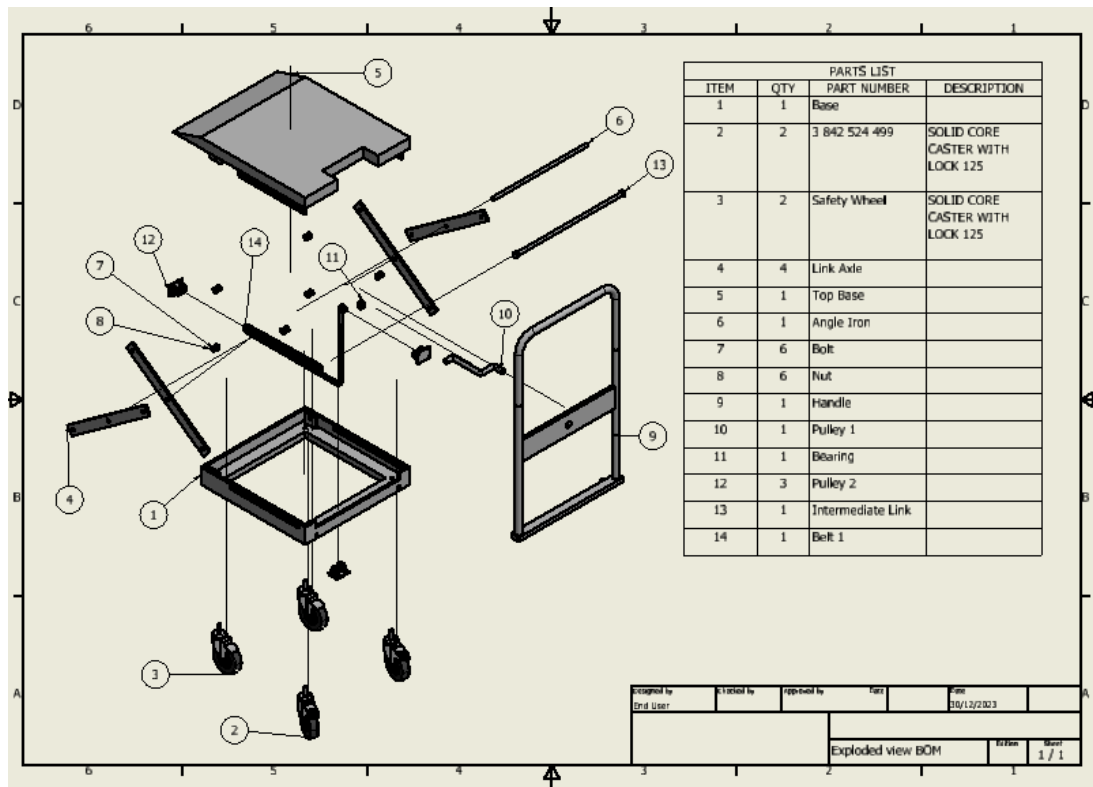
Exploded View and Bill of Material (BOM) for lifting equipment
